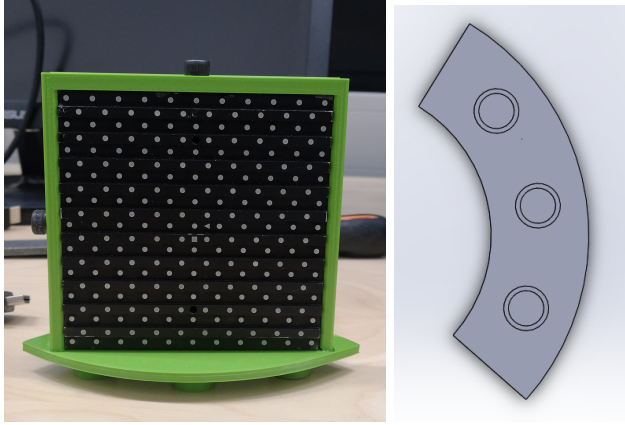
Calibration target and holder, (left) calibration plate secured into holder, (right) cad drawing outlining three holder caps used to fit into injectors.
